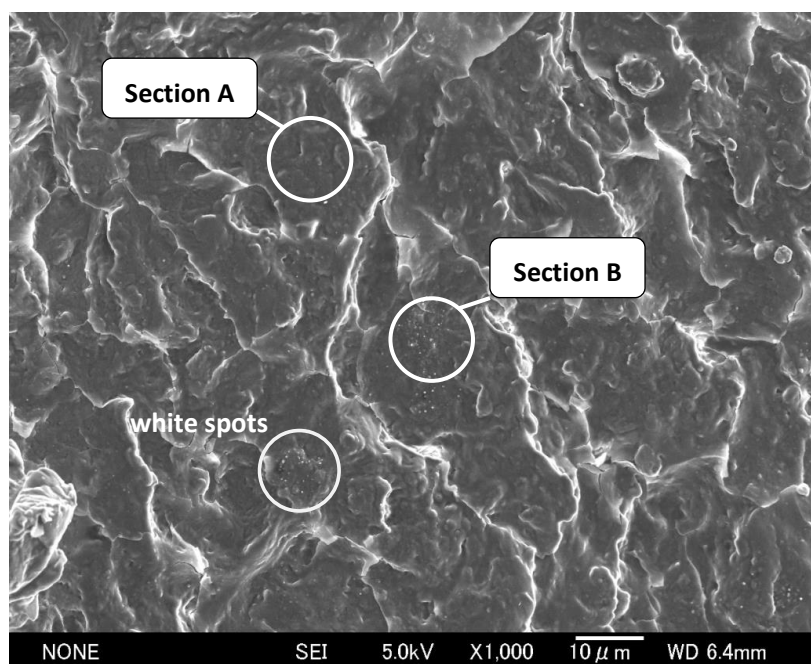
Fractured cross section of PA12-CNT laser sintered part. White spots: possible CNT rich region
